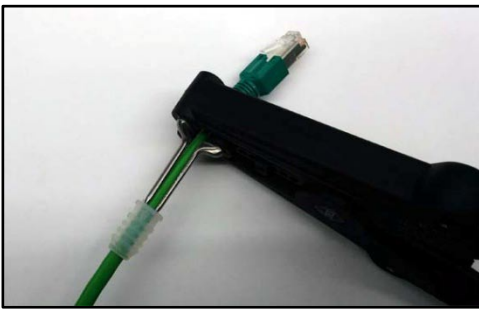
SHROUD REMOVED FROM TOOL PINS
